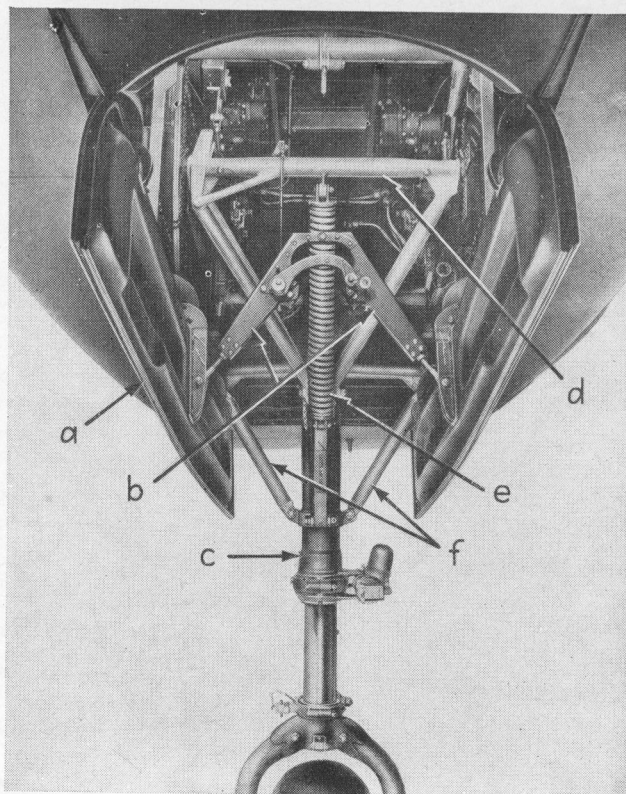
Front landing wheel: (a) nose-wheel door; (b) adjustable yoke; (c) shock strut; (d) cross beam; (e) spring bungee; (f) side brace strut.
